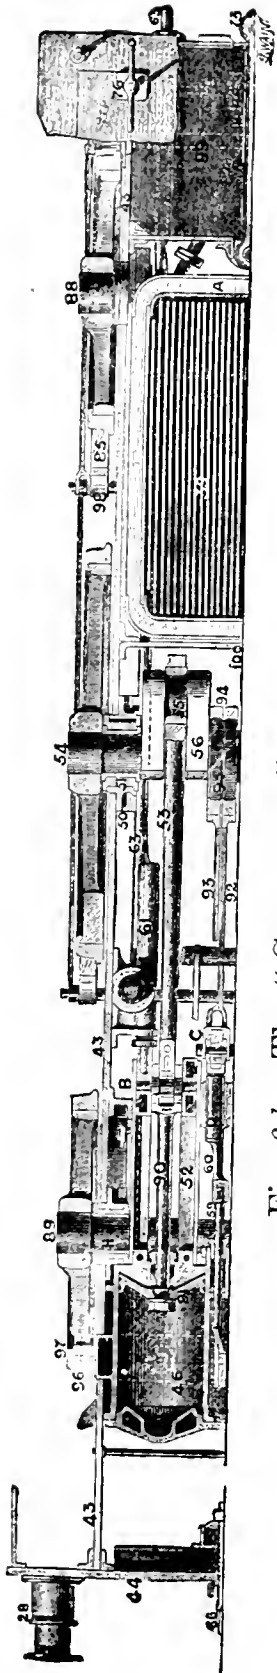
b.—The "GROSVENOR." Half-width Plan.
